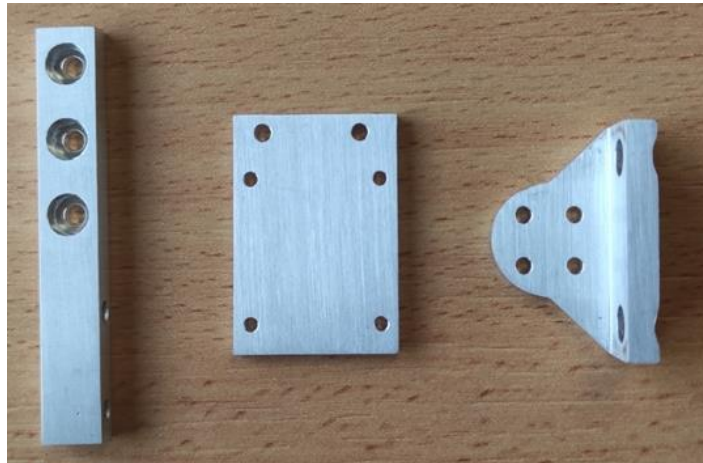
The fabricated pieces in Al6061 by Materialise (external commercial company).
